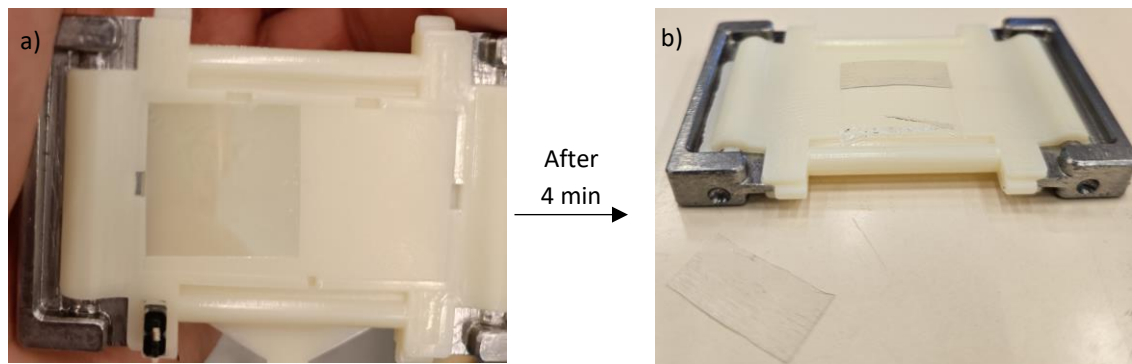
a) hosting part with glass cover slip right after demoulding, b) glass cover slip cracked in the cooling process due to shrinkage
